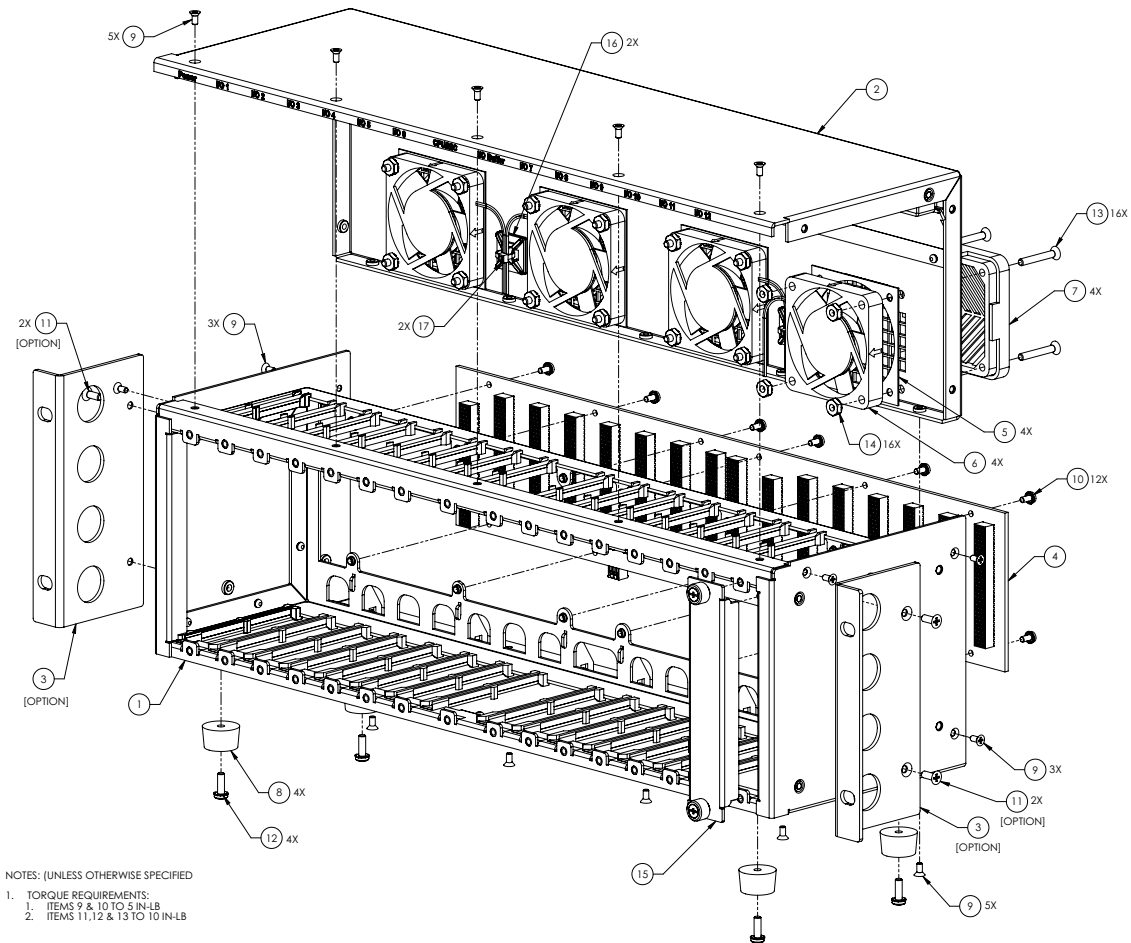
Typical RACKtangle Enclosure (Exploded View)
